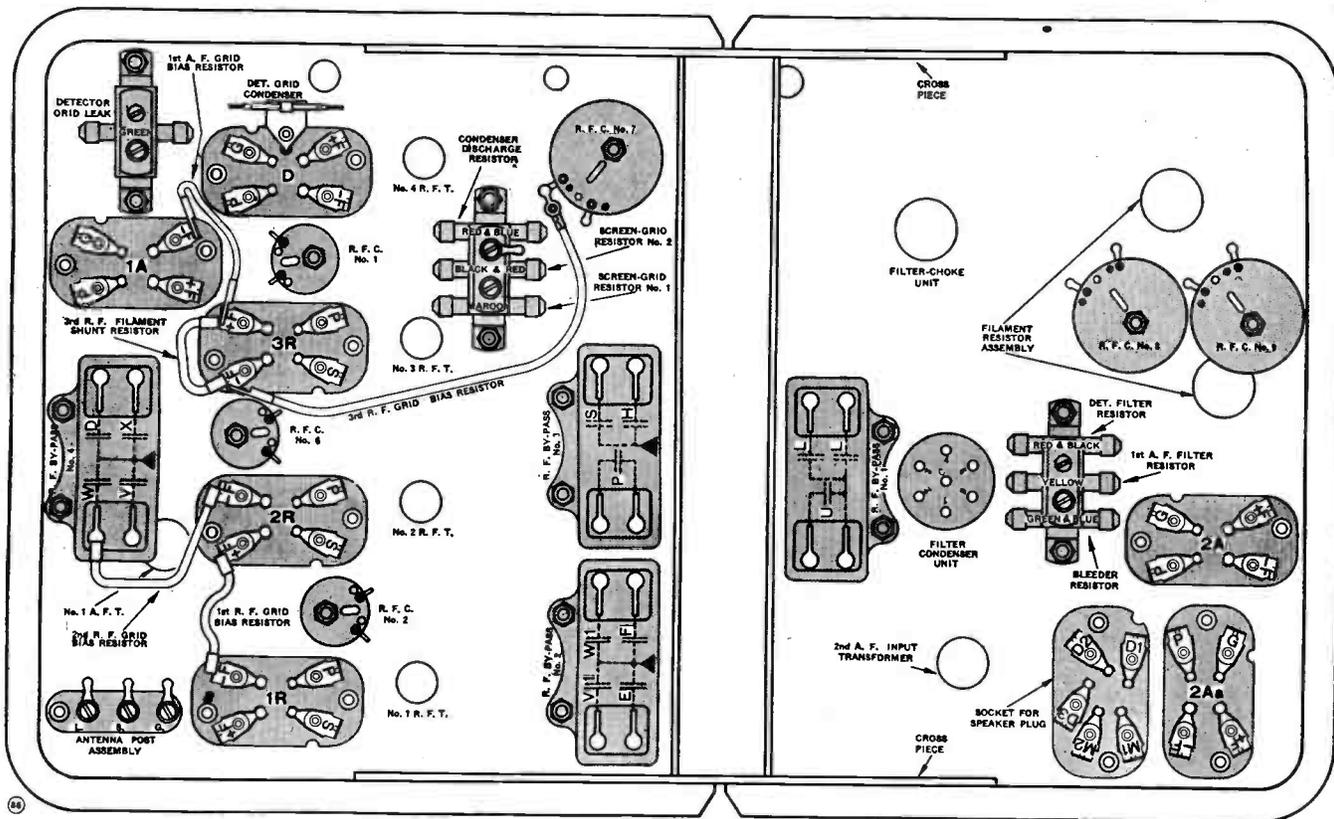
BOTTOM VIEW OF TYPE D CHASSIS.
